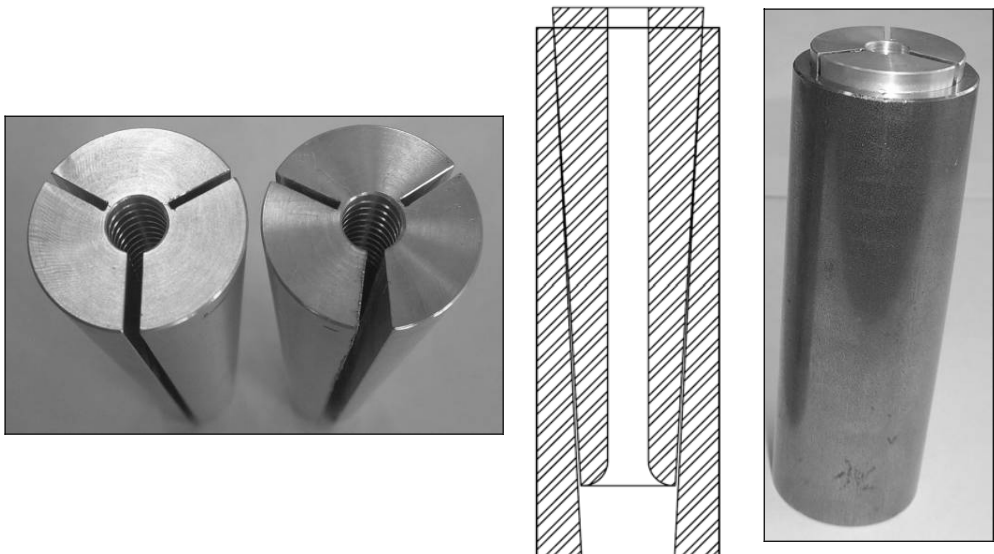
Left: Wedge from the fifth design compared to the wedge from the final design; Centre: Drawing of an assembled anchorage with the final design; Right: Picture of an assembled anchorage with the final design
